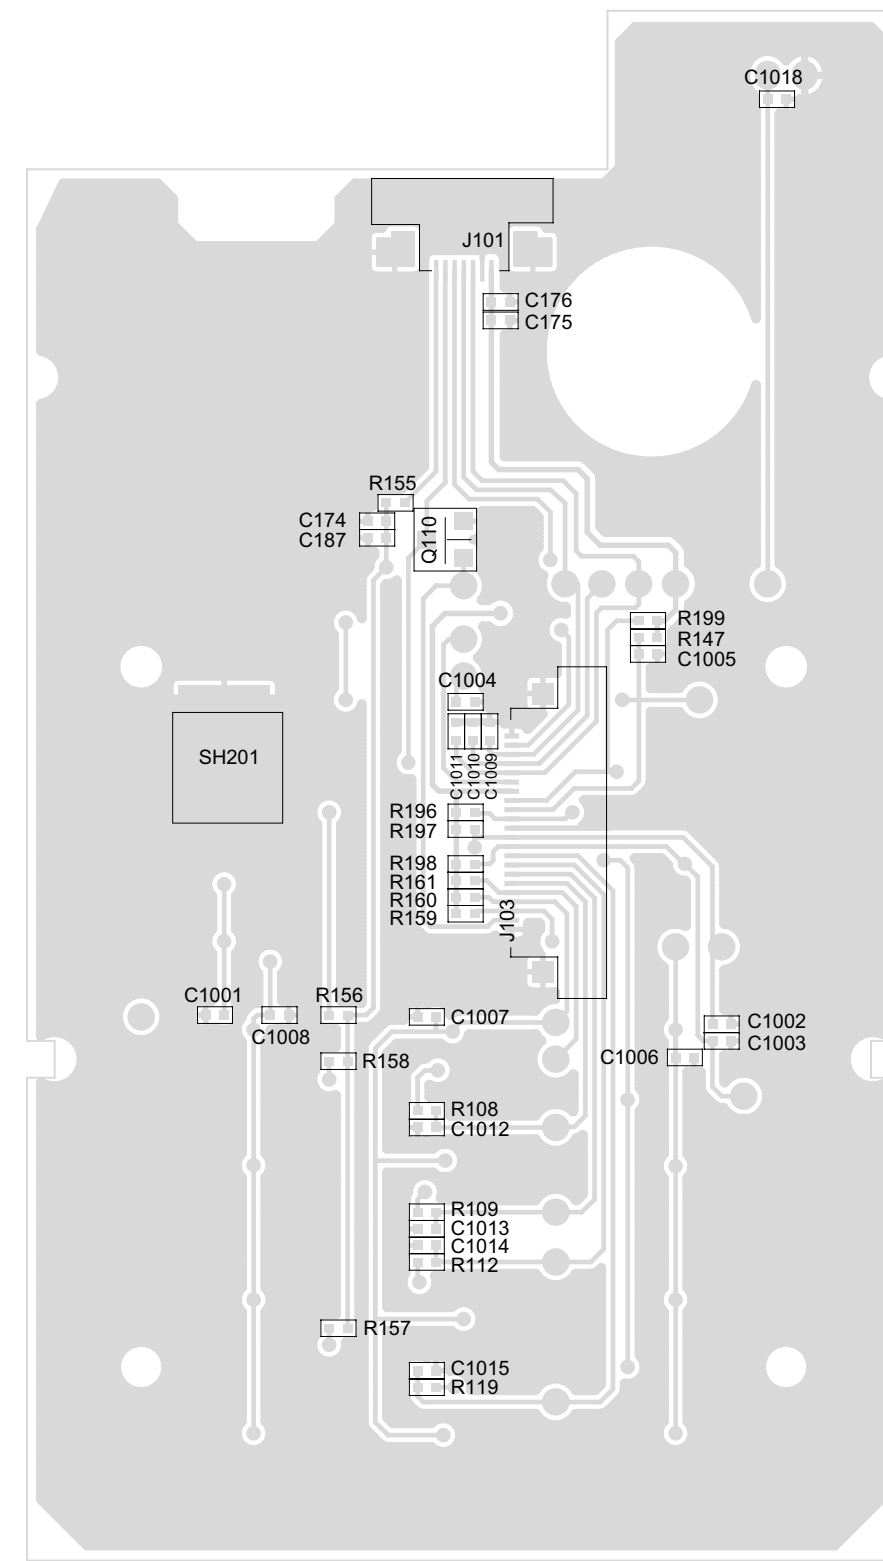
UHF1 (403–447 MHz) Keypad Board: PCB No. E11-000886-00
